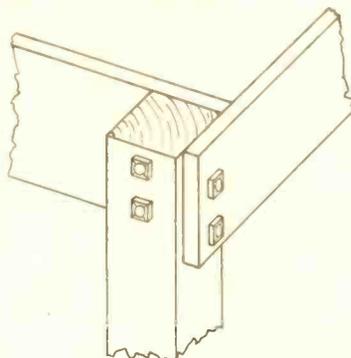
Showing one satisfactory method of bolting the legs of a table to the front and side members of the top. Note that carriage bolts, not wood screws or nails, should be used to hold the members together.
